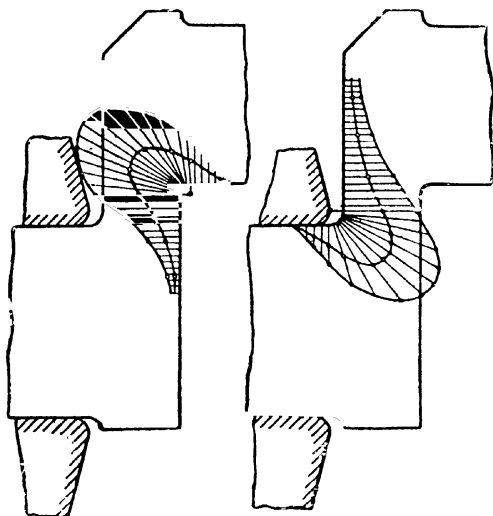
STRESSES IN CRANK-SHAFT FILLETS.
